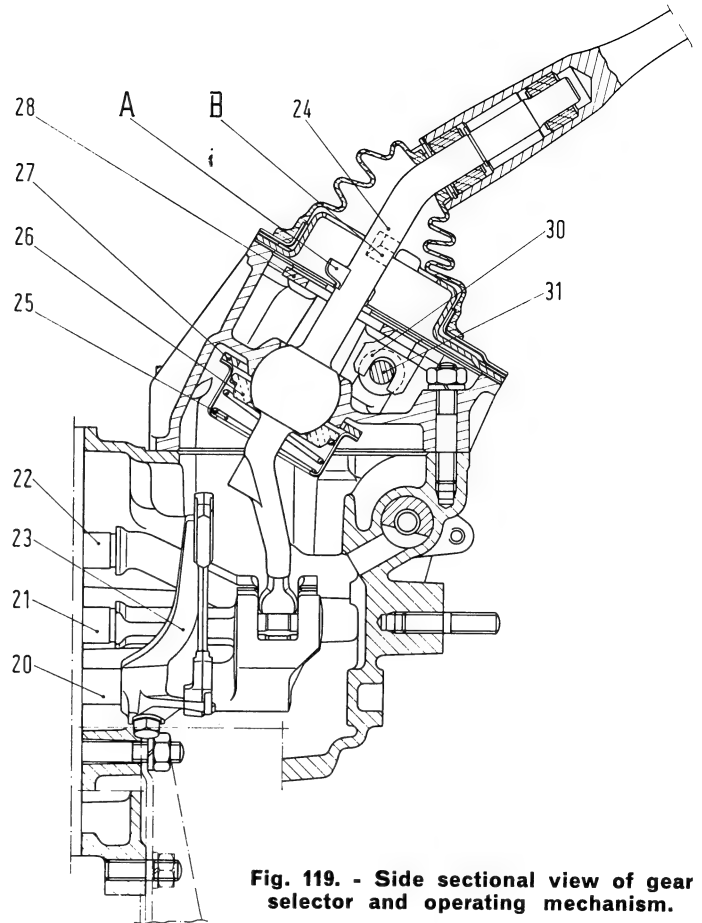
Side sectional view of gear selector and operating mechanism.
